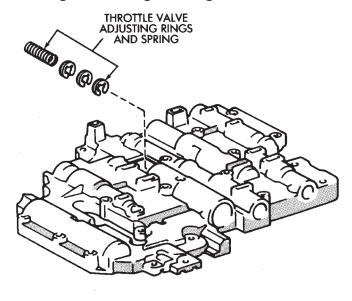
Throttle Valve Adjusting Ring Location (If Equipped)
